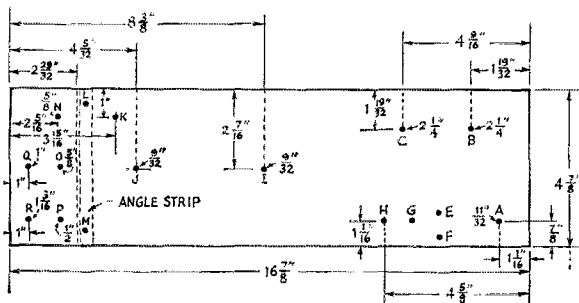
Sketch showing dimensions and layout of the chassis panel. Lettered points are identified in the text.
